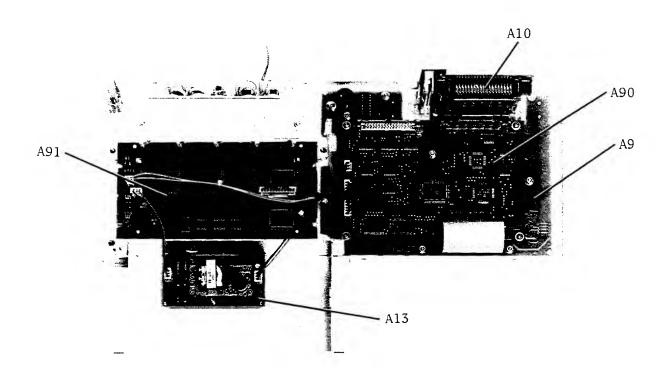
A9, A10, A13, A90, or A91 Assembly Removal
